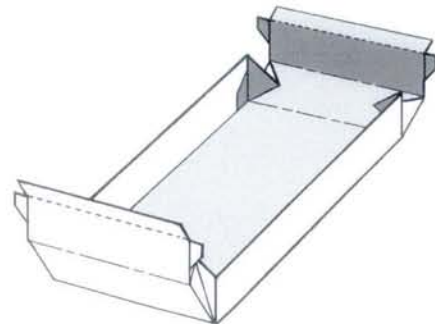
B: This shows the customer assembly steps. The Simplex is typically hand assembled, but most of the glued corner styles are likely to be machine assembled.
